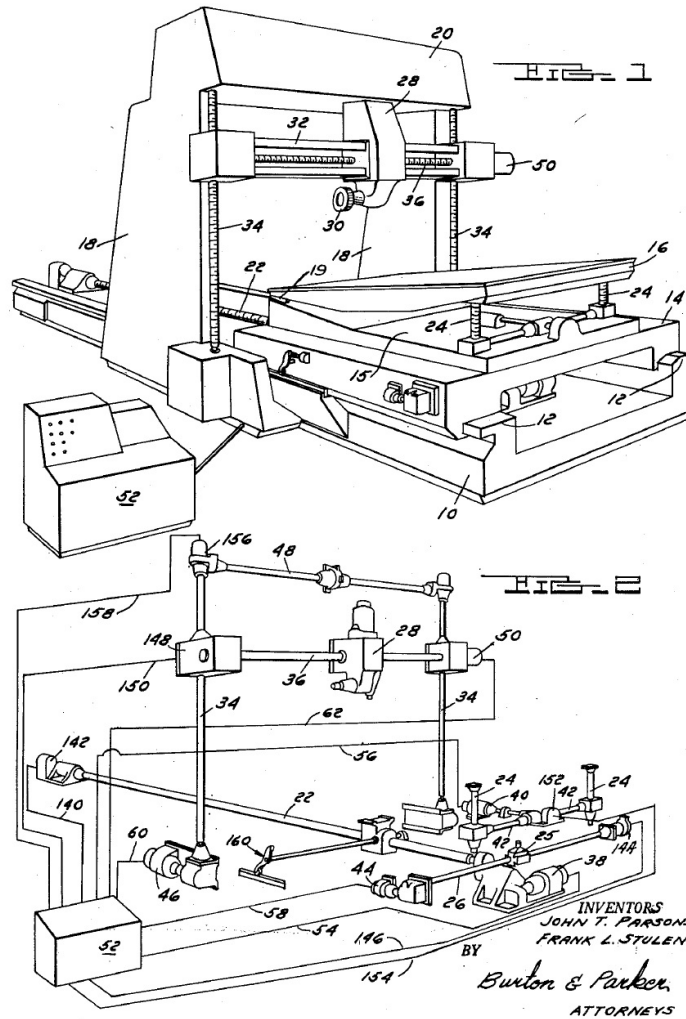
First page of the patent on “Motor Controlled Apparatus for Positioning Machine Tool” [74].
